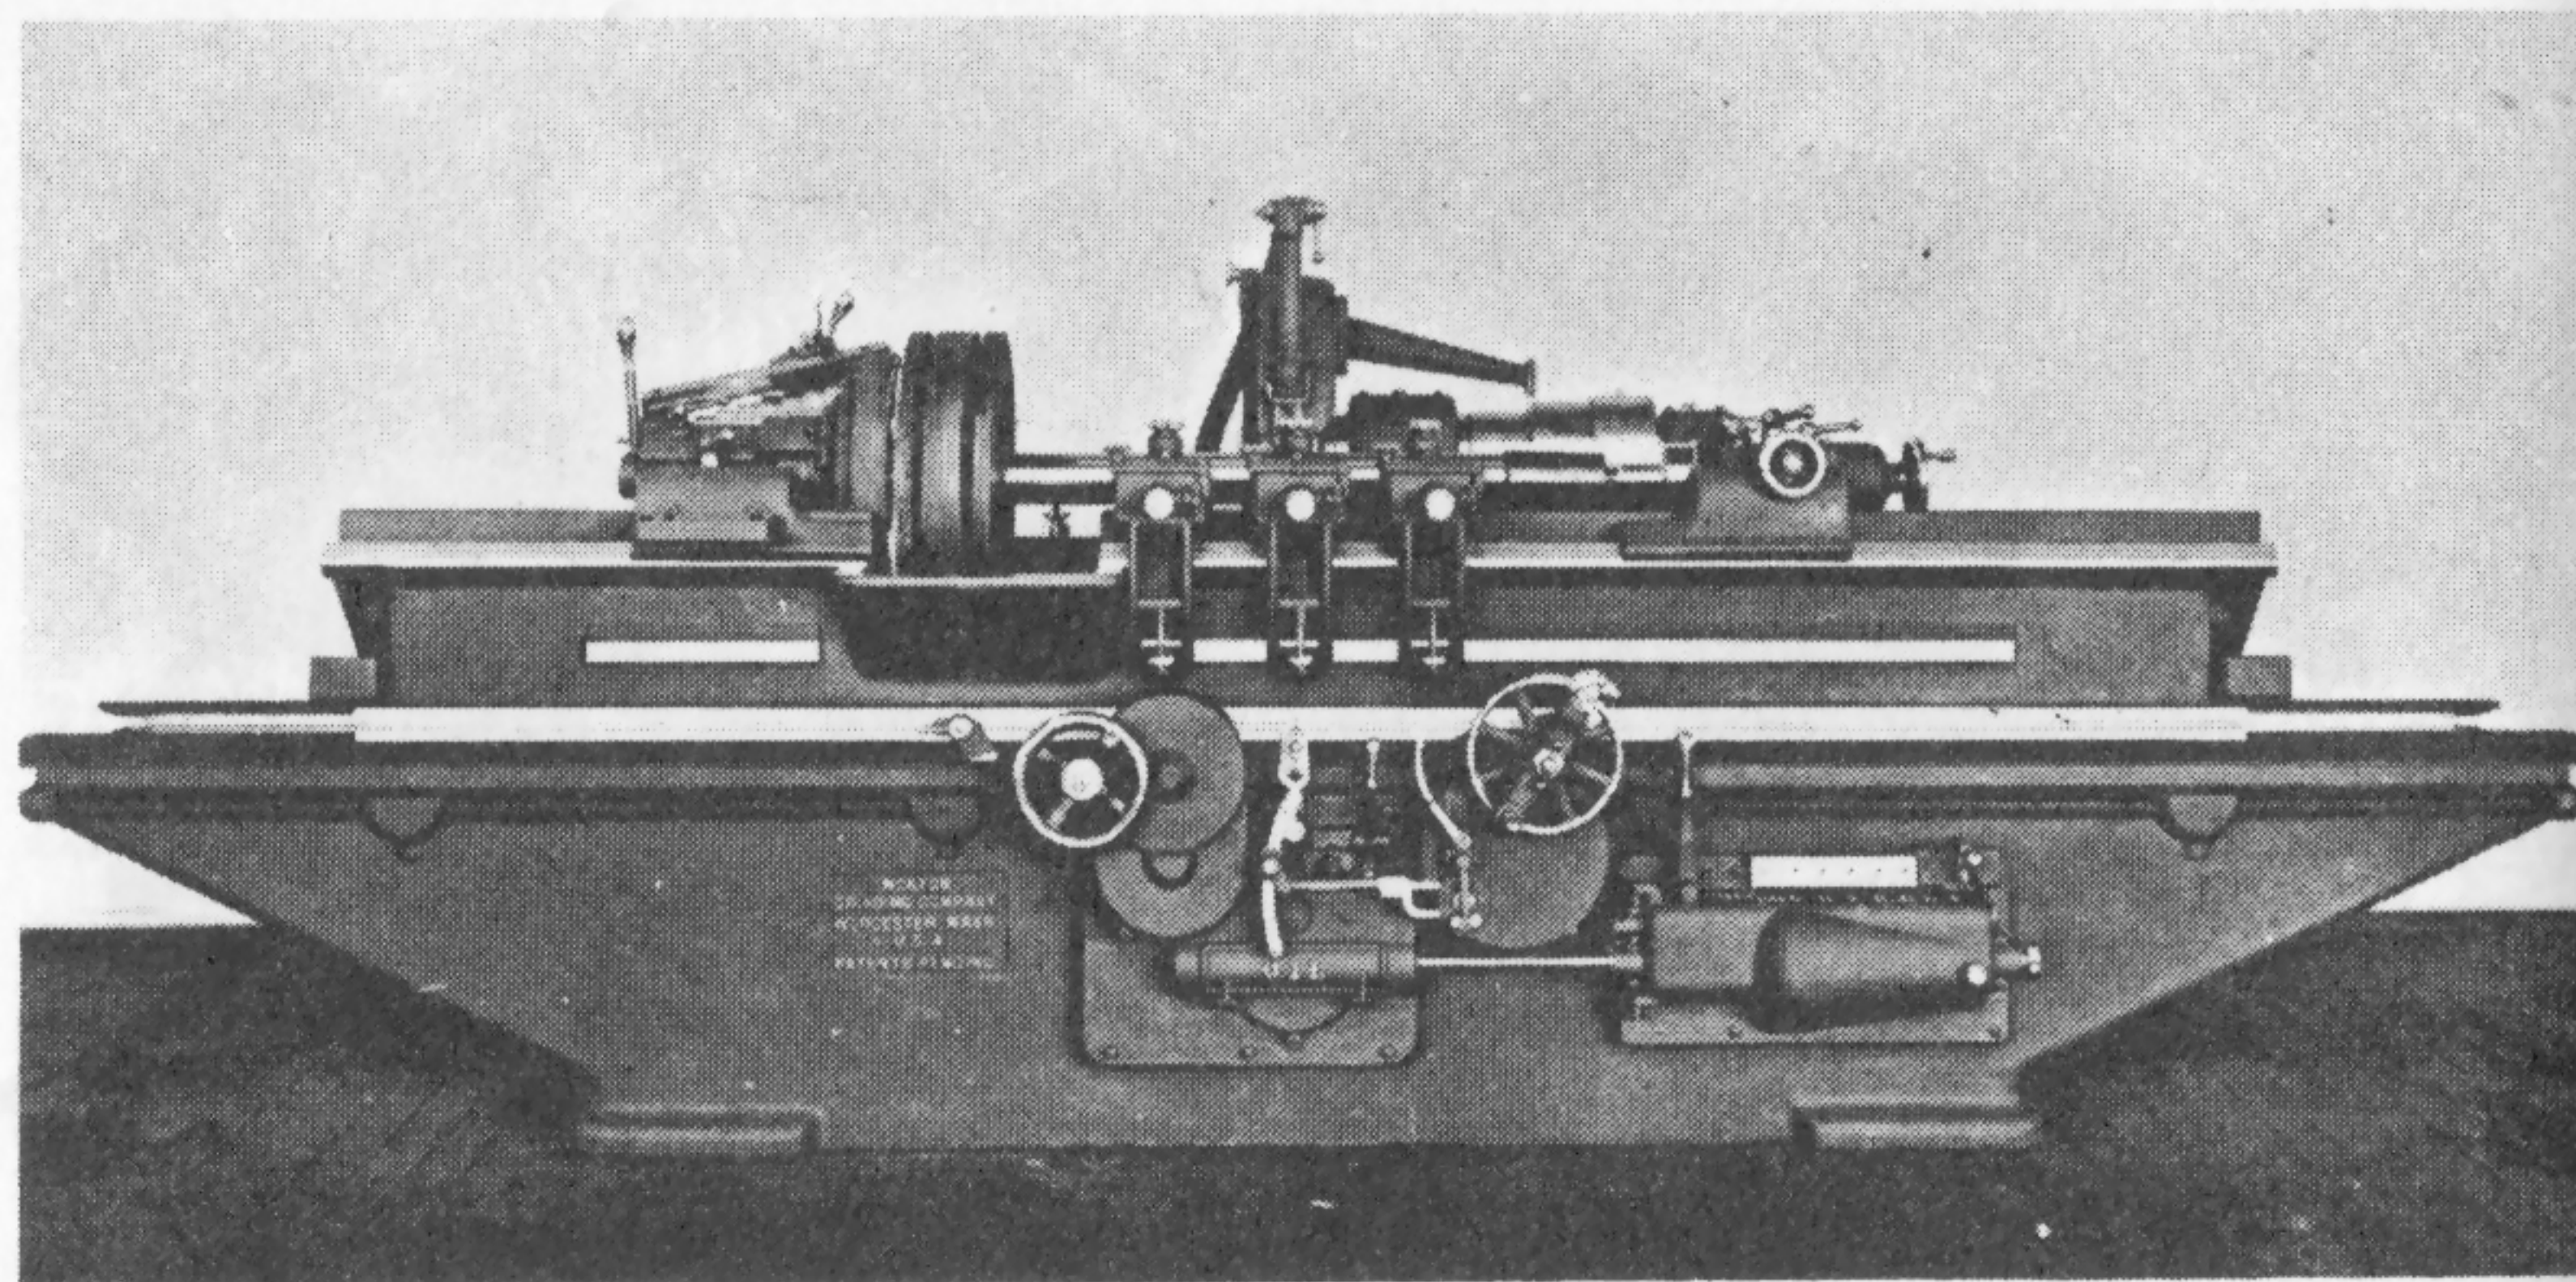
NORTON'S GAP GRINDING MACHINE FOR LOCOMOTIVE PISTON RODS, 1902 (Norton Company)
